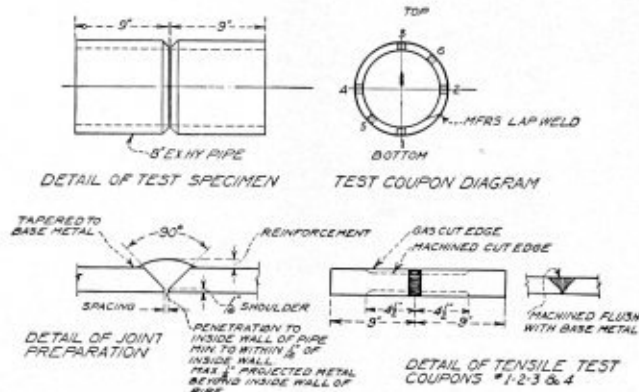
Tensile and bend test specimen for pipe welding
